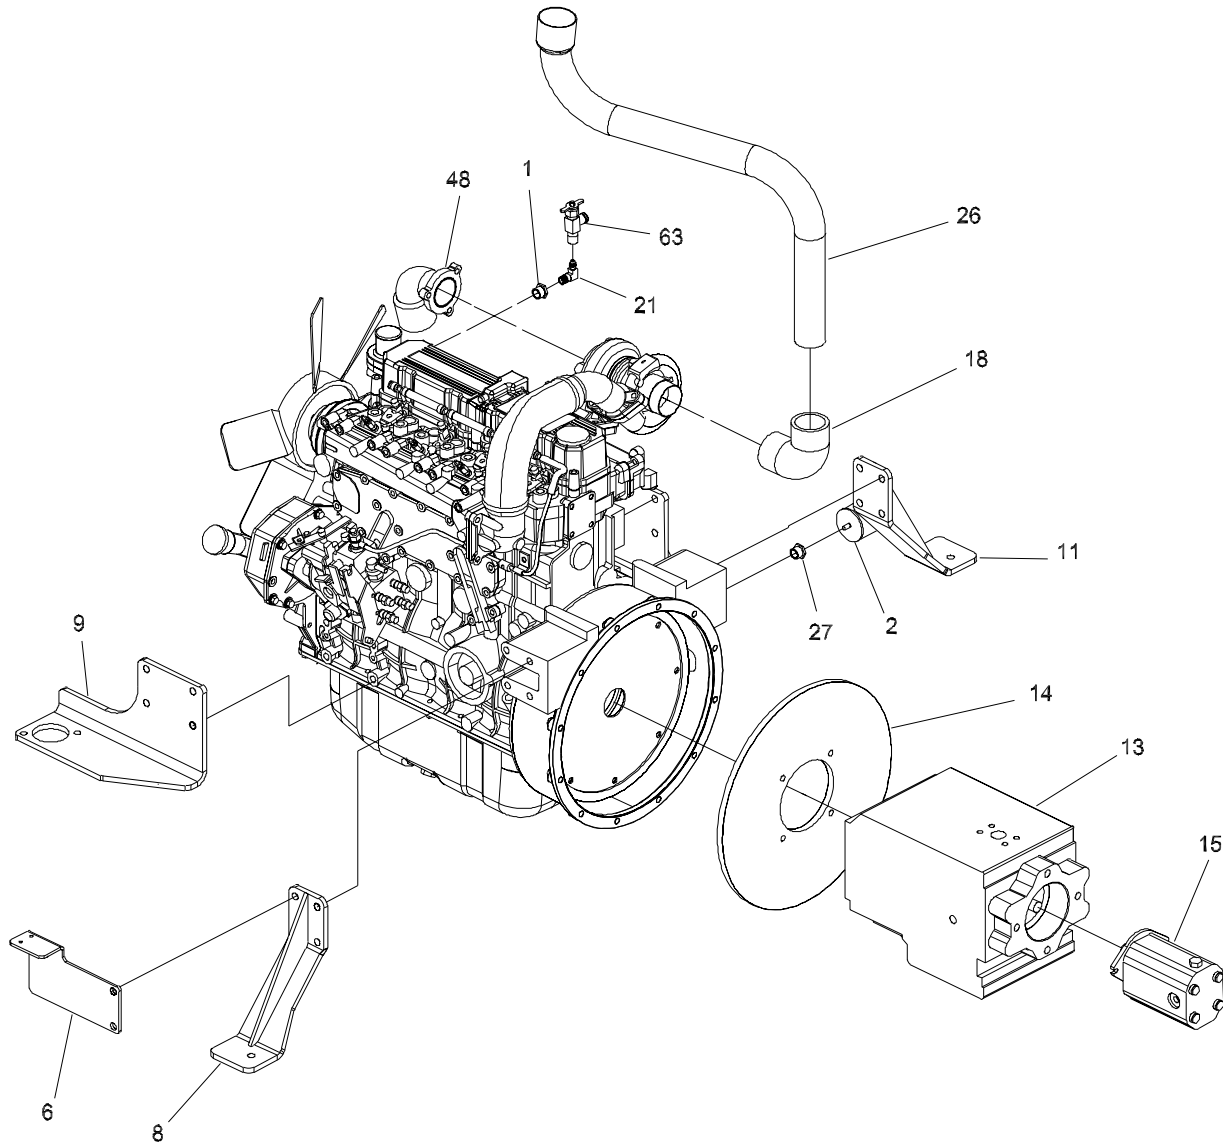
ENGINE SUBASSEMBLY, CATERPILLAR (SHEET 1 OF 2)
